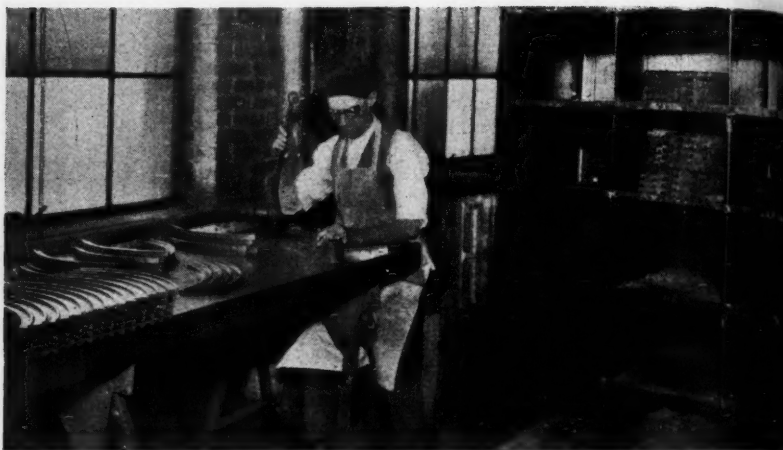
Sorting and Salvaging Sectional Piston Packing
